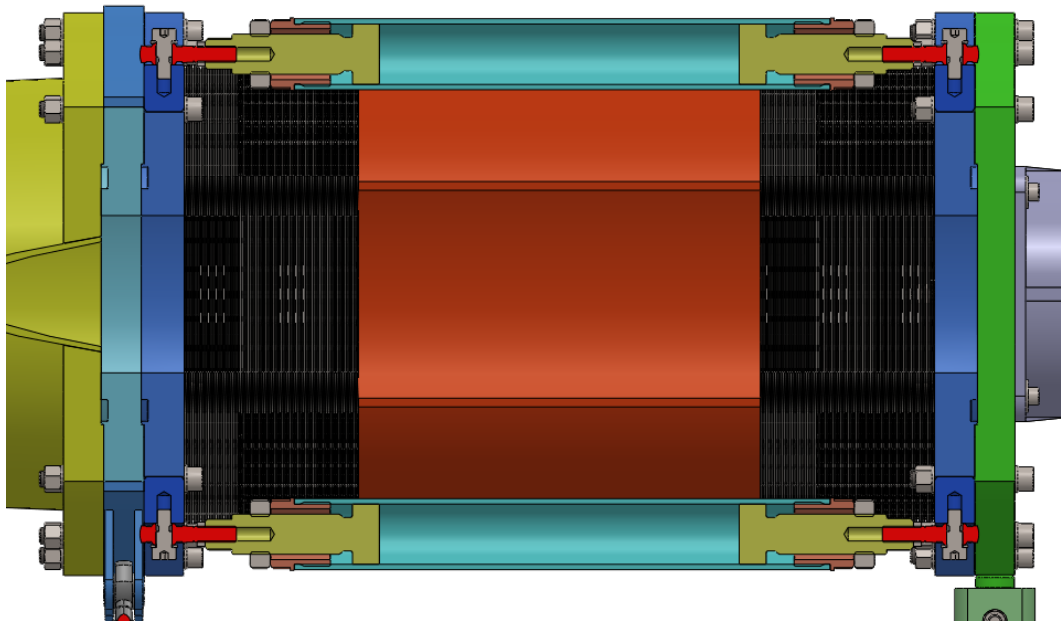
Cut view through slender strut tube with telescopic workpieces
